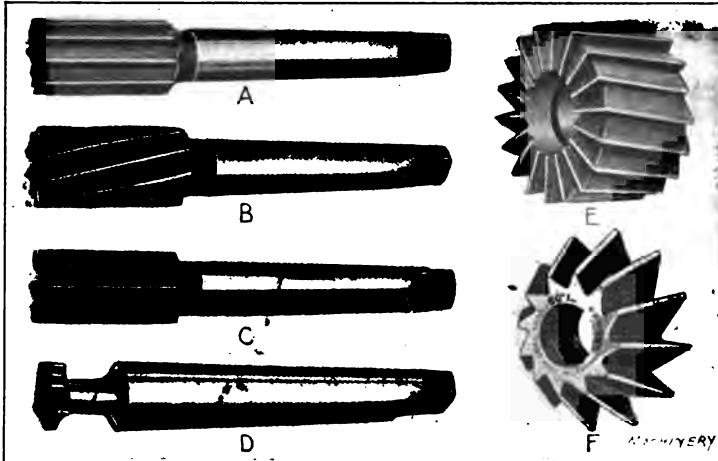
End Mills, T-slot Cutter, Shell End Mill, and Angular Cutter
